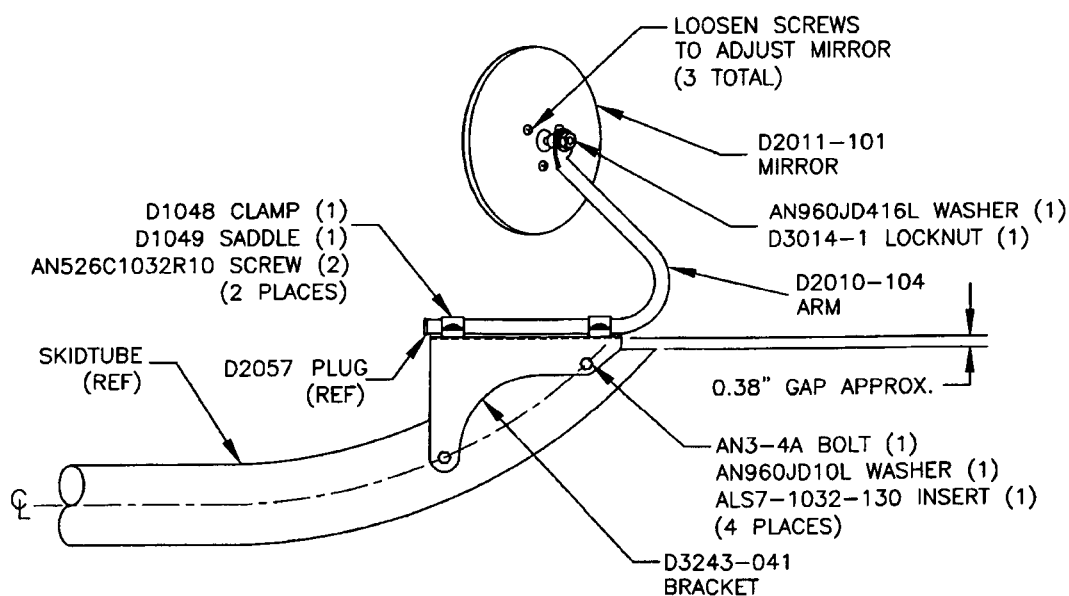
Cargo Mirror Installation (SIDE VIEW)
